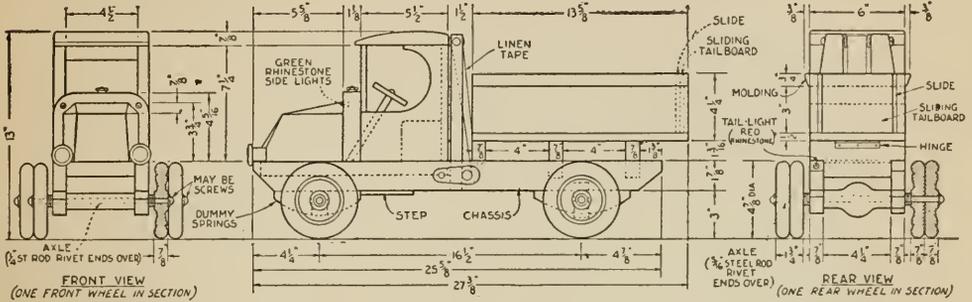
Working drawings of the dump truck. Of impressive size, this truck is an exceptionally rugged toy for rough play.
